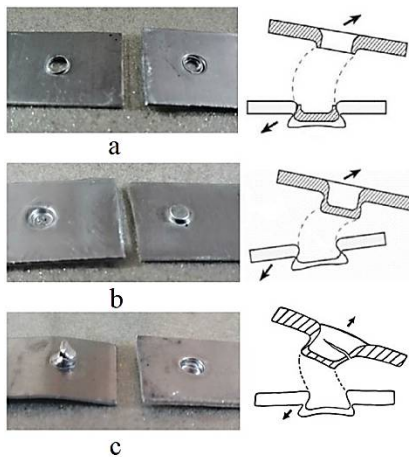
failure modes of the clinched joint a) neck fracture, b) bottom separation and c) combined type
